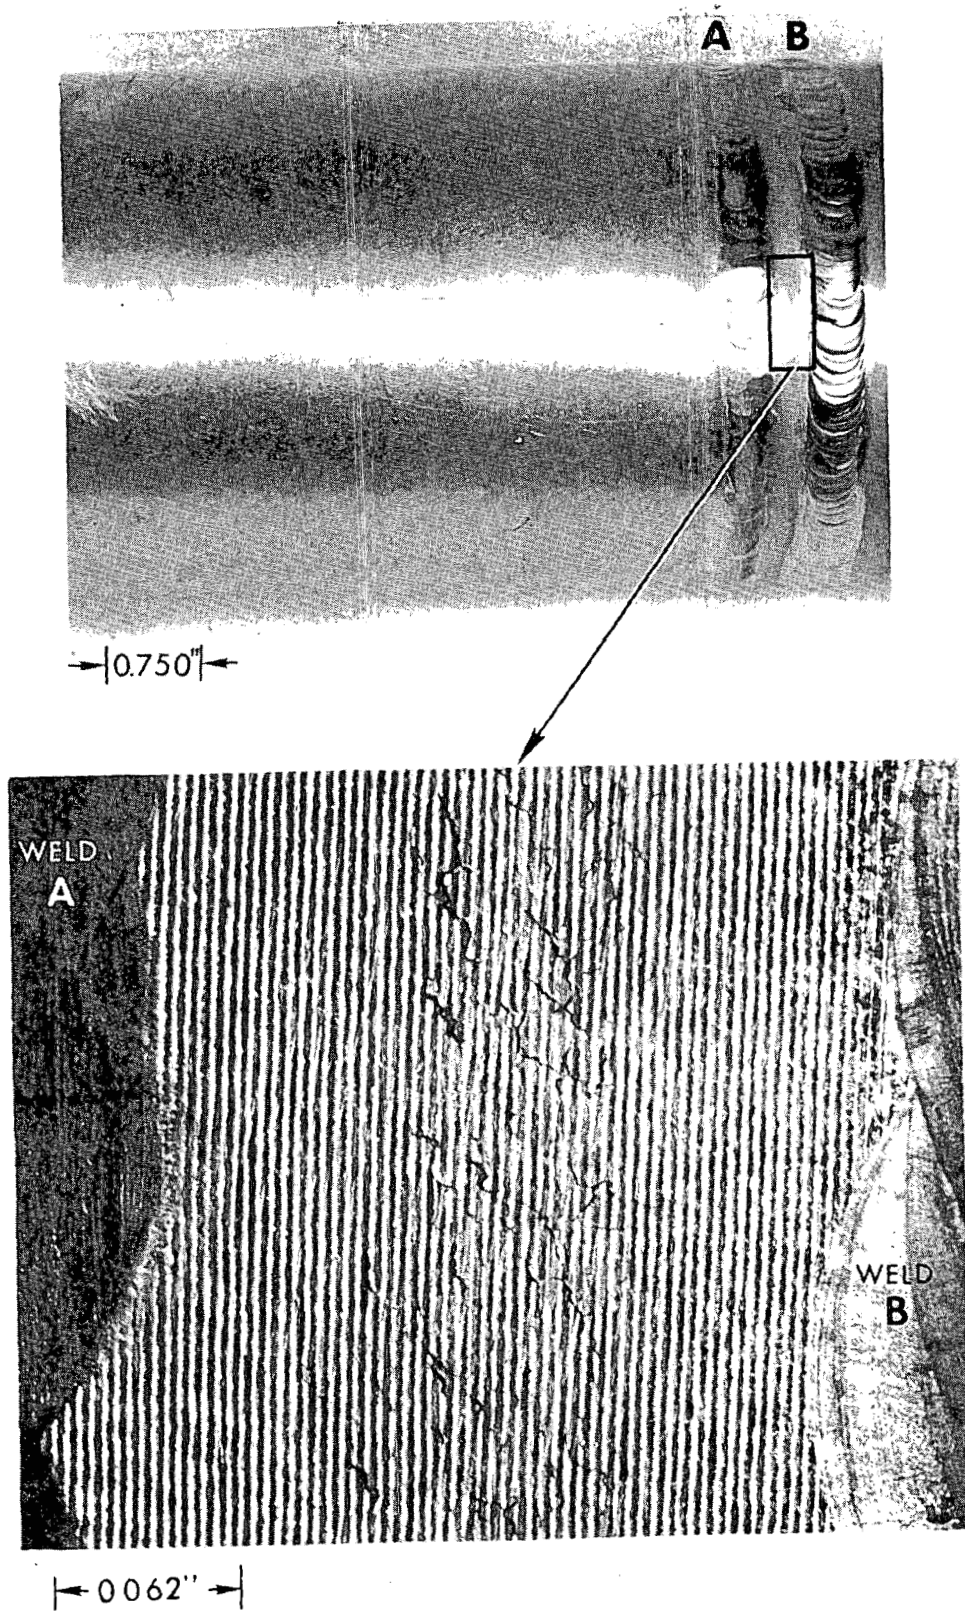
Typical area of cracking between GTA welds of T-111 alloy EM pump duct.
